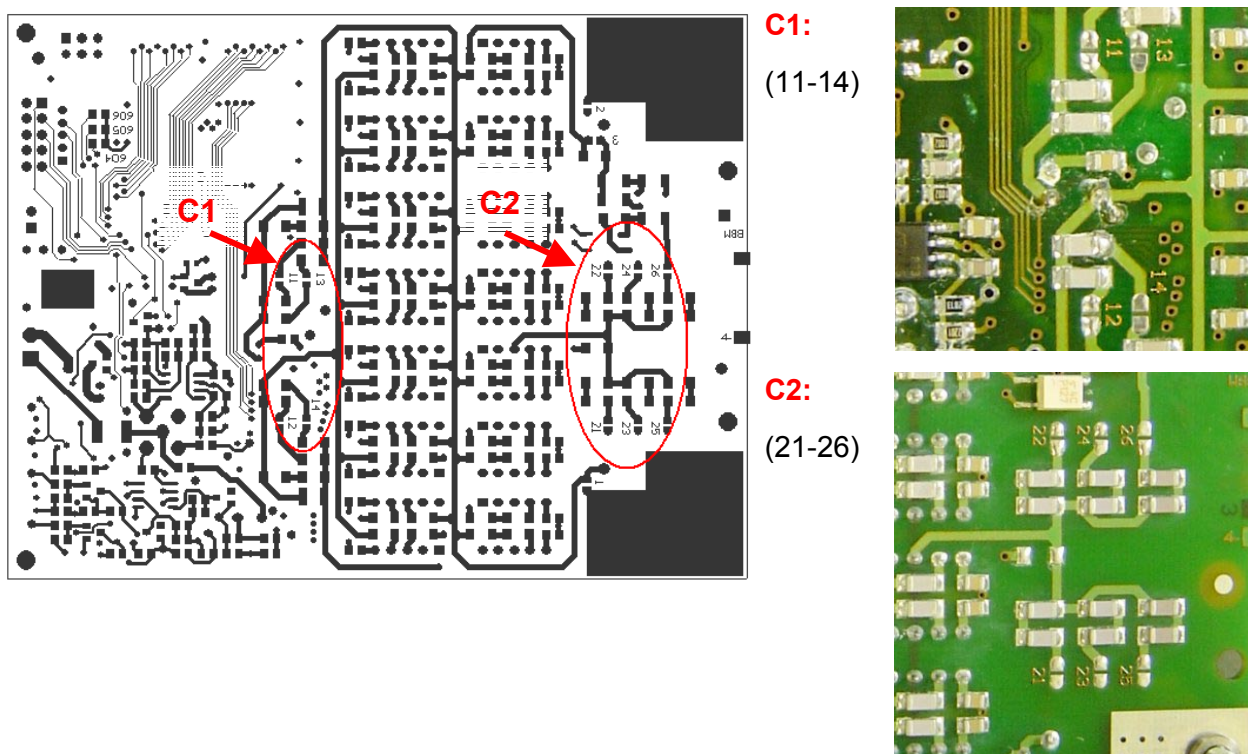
Solder jumpers for the matching capacitors on underneath side
